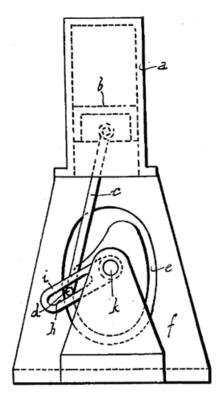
illustrates a crank gearing comprising primarily only links or levers for converting rotary motion of the crank shaft into reciprocating motion of the piston which functions as a guided slide. The gearing further includes a crosshead a functioning as an additional guide.
